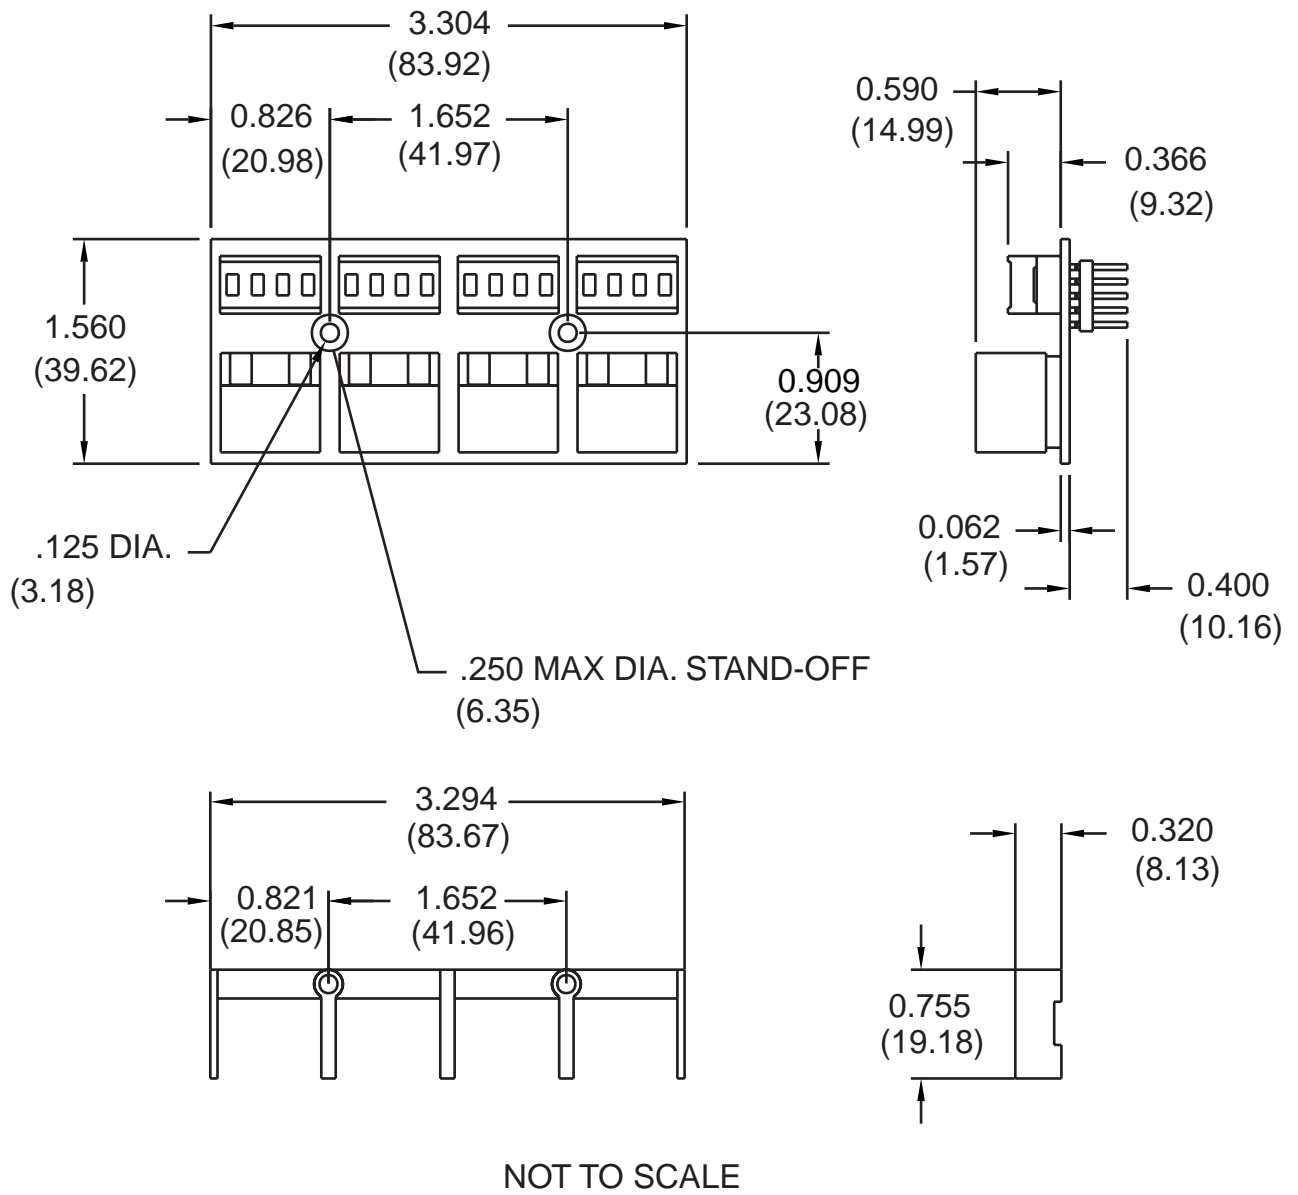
Pushbutton Key PC Board Dimensions (not to scale)
